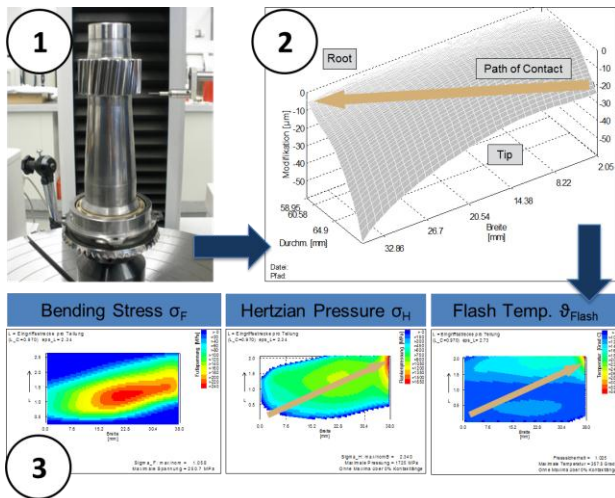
Principle process of loaded tooth contact analysis based on machined gear data on cylindrical gears
